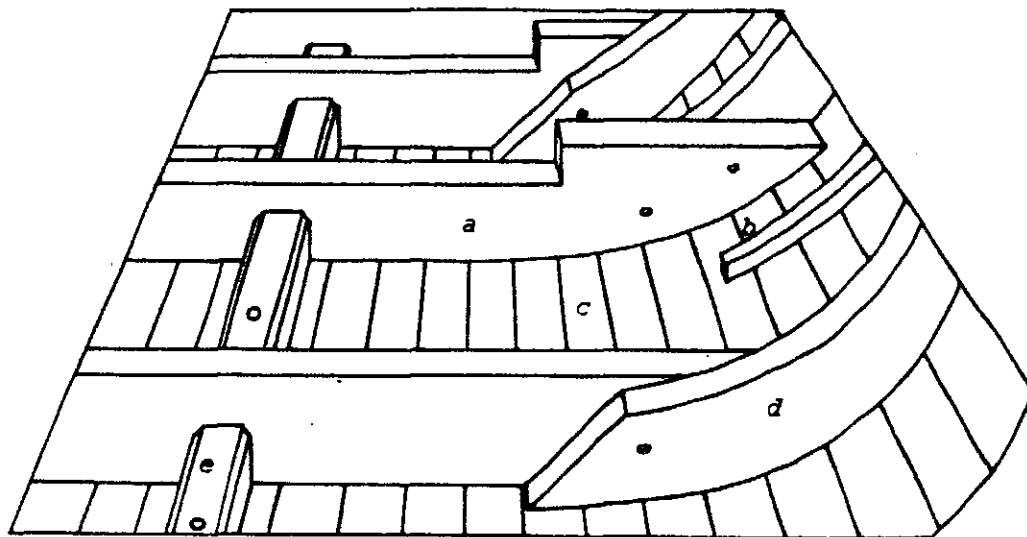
Detail of M/V Fox framing. (a) floor timber;
